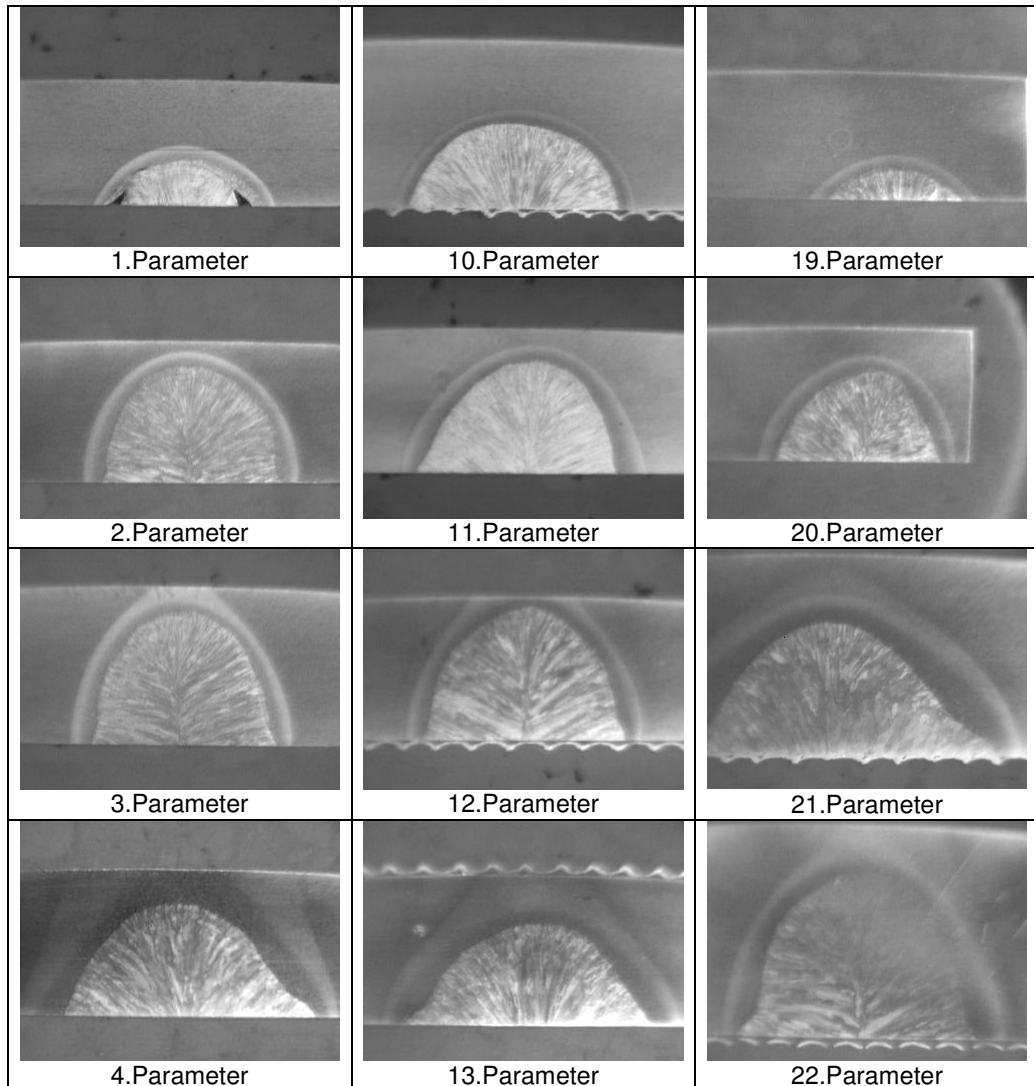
Macro photos of welds at 2,5X magnification
